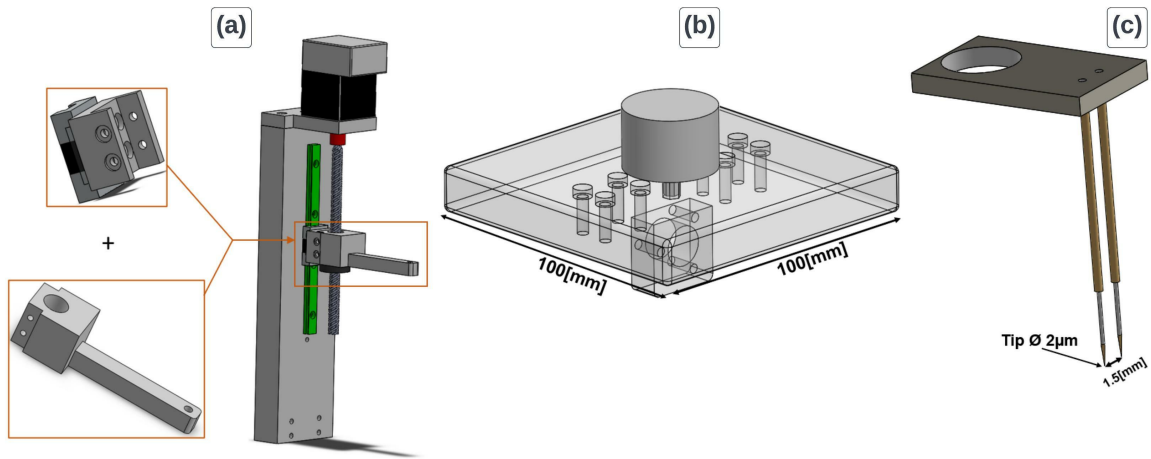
(a) The full z-axis positioning stage. On the left-hand side, we see how the probe arm is connected to the carriage by a bracket. (b) A 100x100 [mm] sample plate. It has a hexagonal cylinder-shaped hole that holds the top sample holder used in case of small or special samples. (c) The probe mount model.
